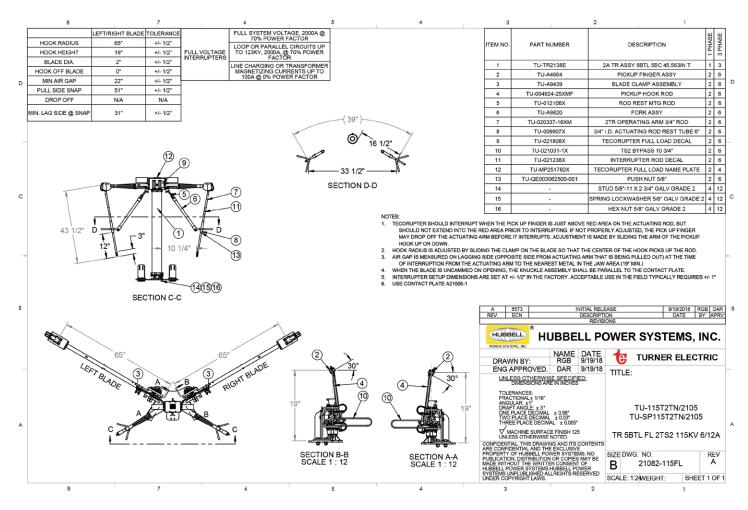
The above drawing is a sample of a TECORupter setup drawing.
